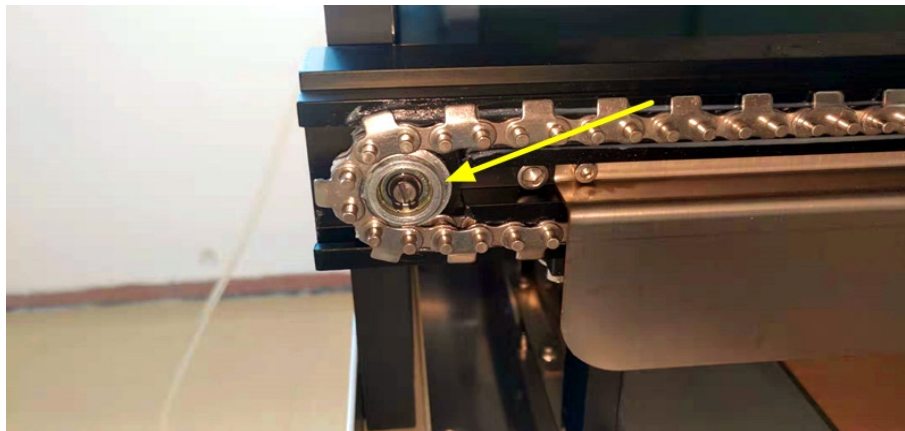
7loosening of the sprockets prevents the conveyor chain from working
